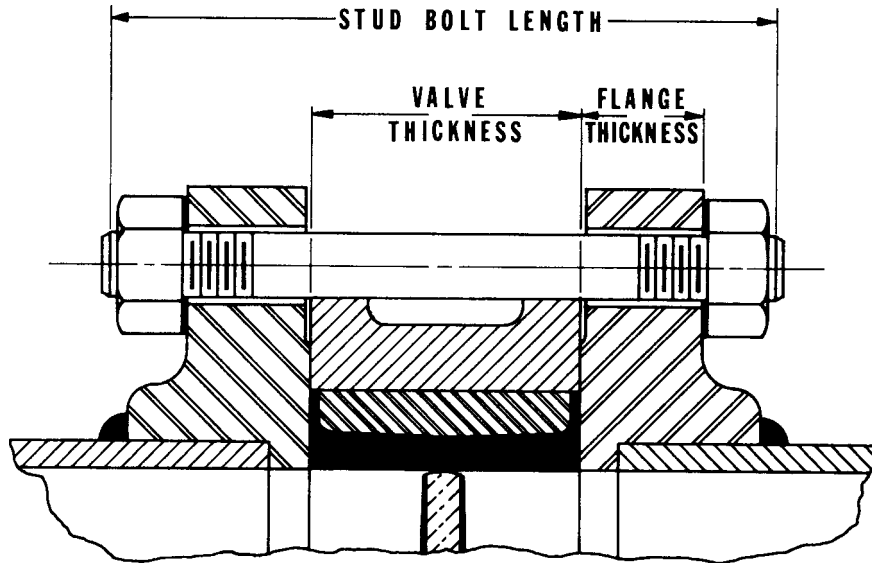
Butterfly Valve Stud Bolt Assembly with 150-psi Steel or Bronze Flanges
